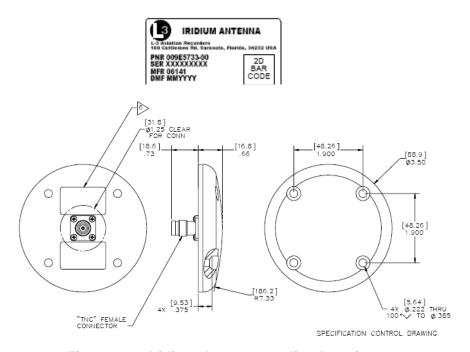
Iridium Antenna Outline Drawing (dimensions in [millimeters] and inches)
